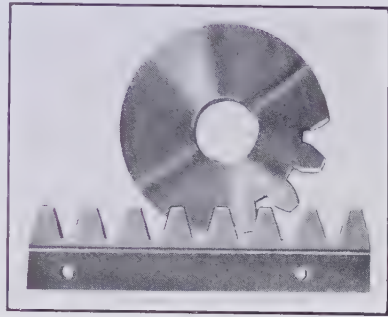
Rack-shaped cutter meshing with partially finished blank.
